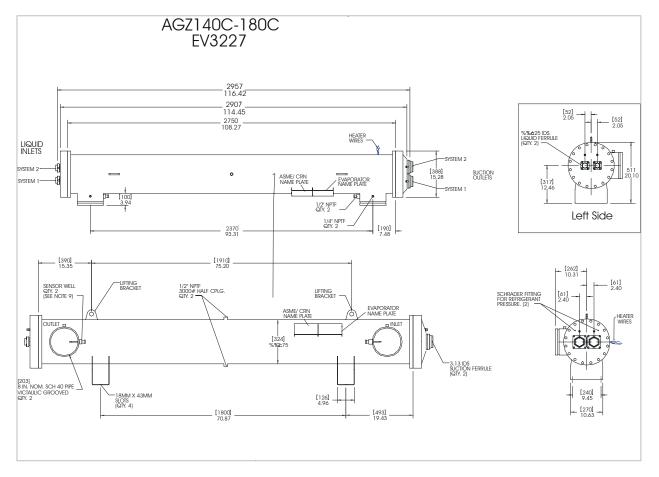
, Remote Evaporators, AGZ 140CB - 180CB
